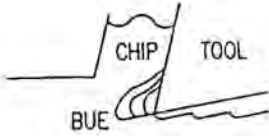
The sawtoothed surface caused by the built-up edge.
